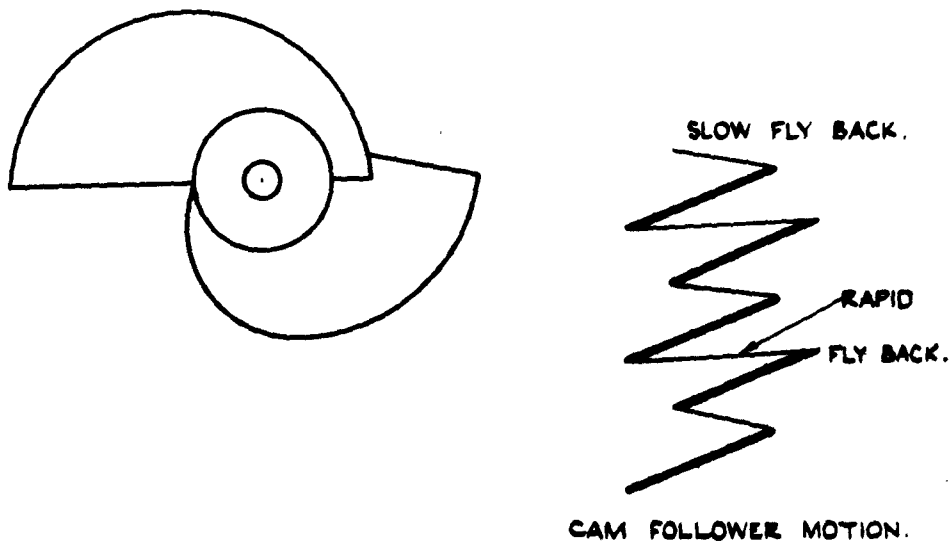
(b). CAM FOR AUTOMATIC ENGRAVING HEAD.
